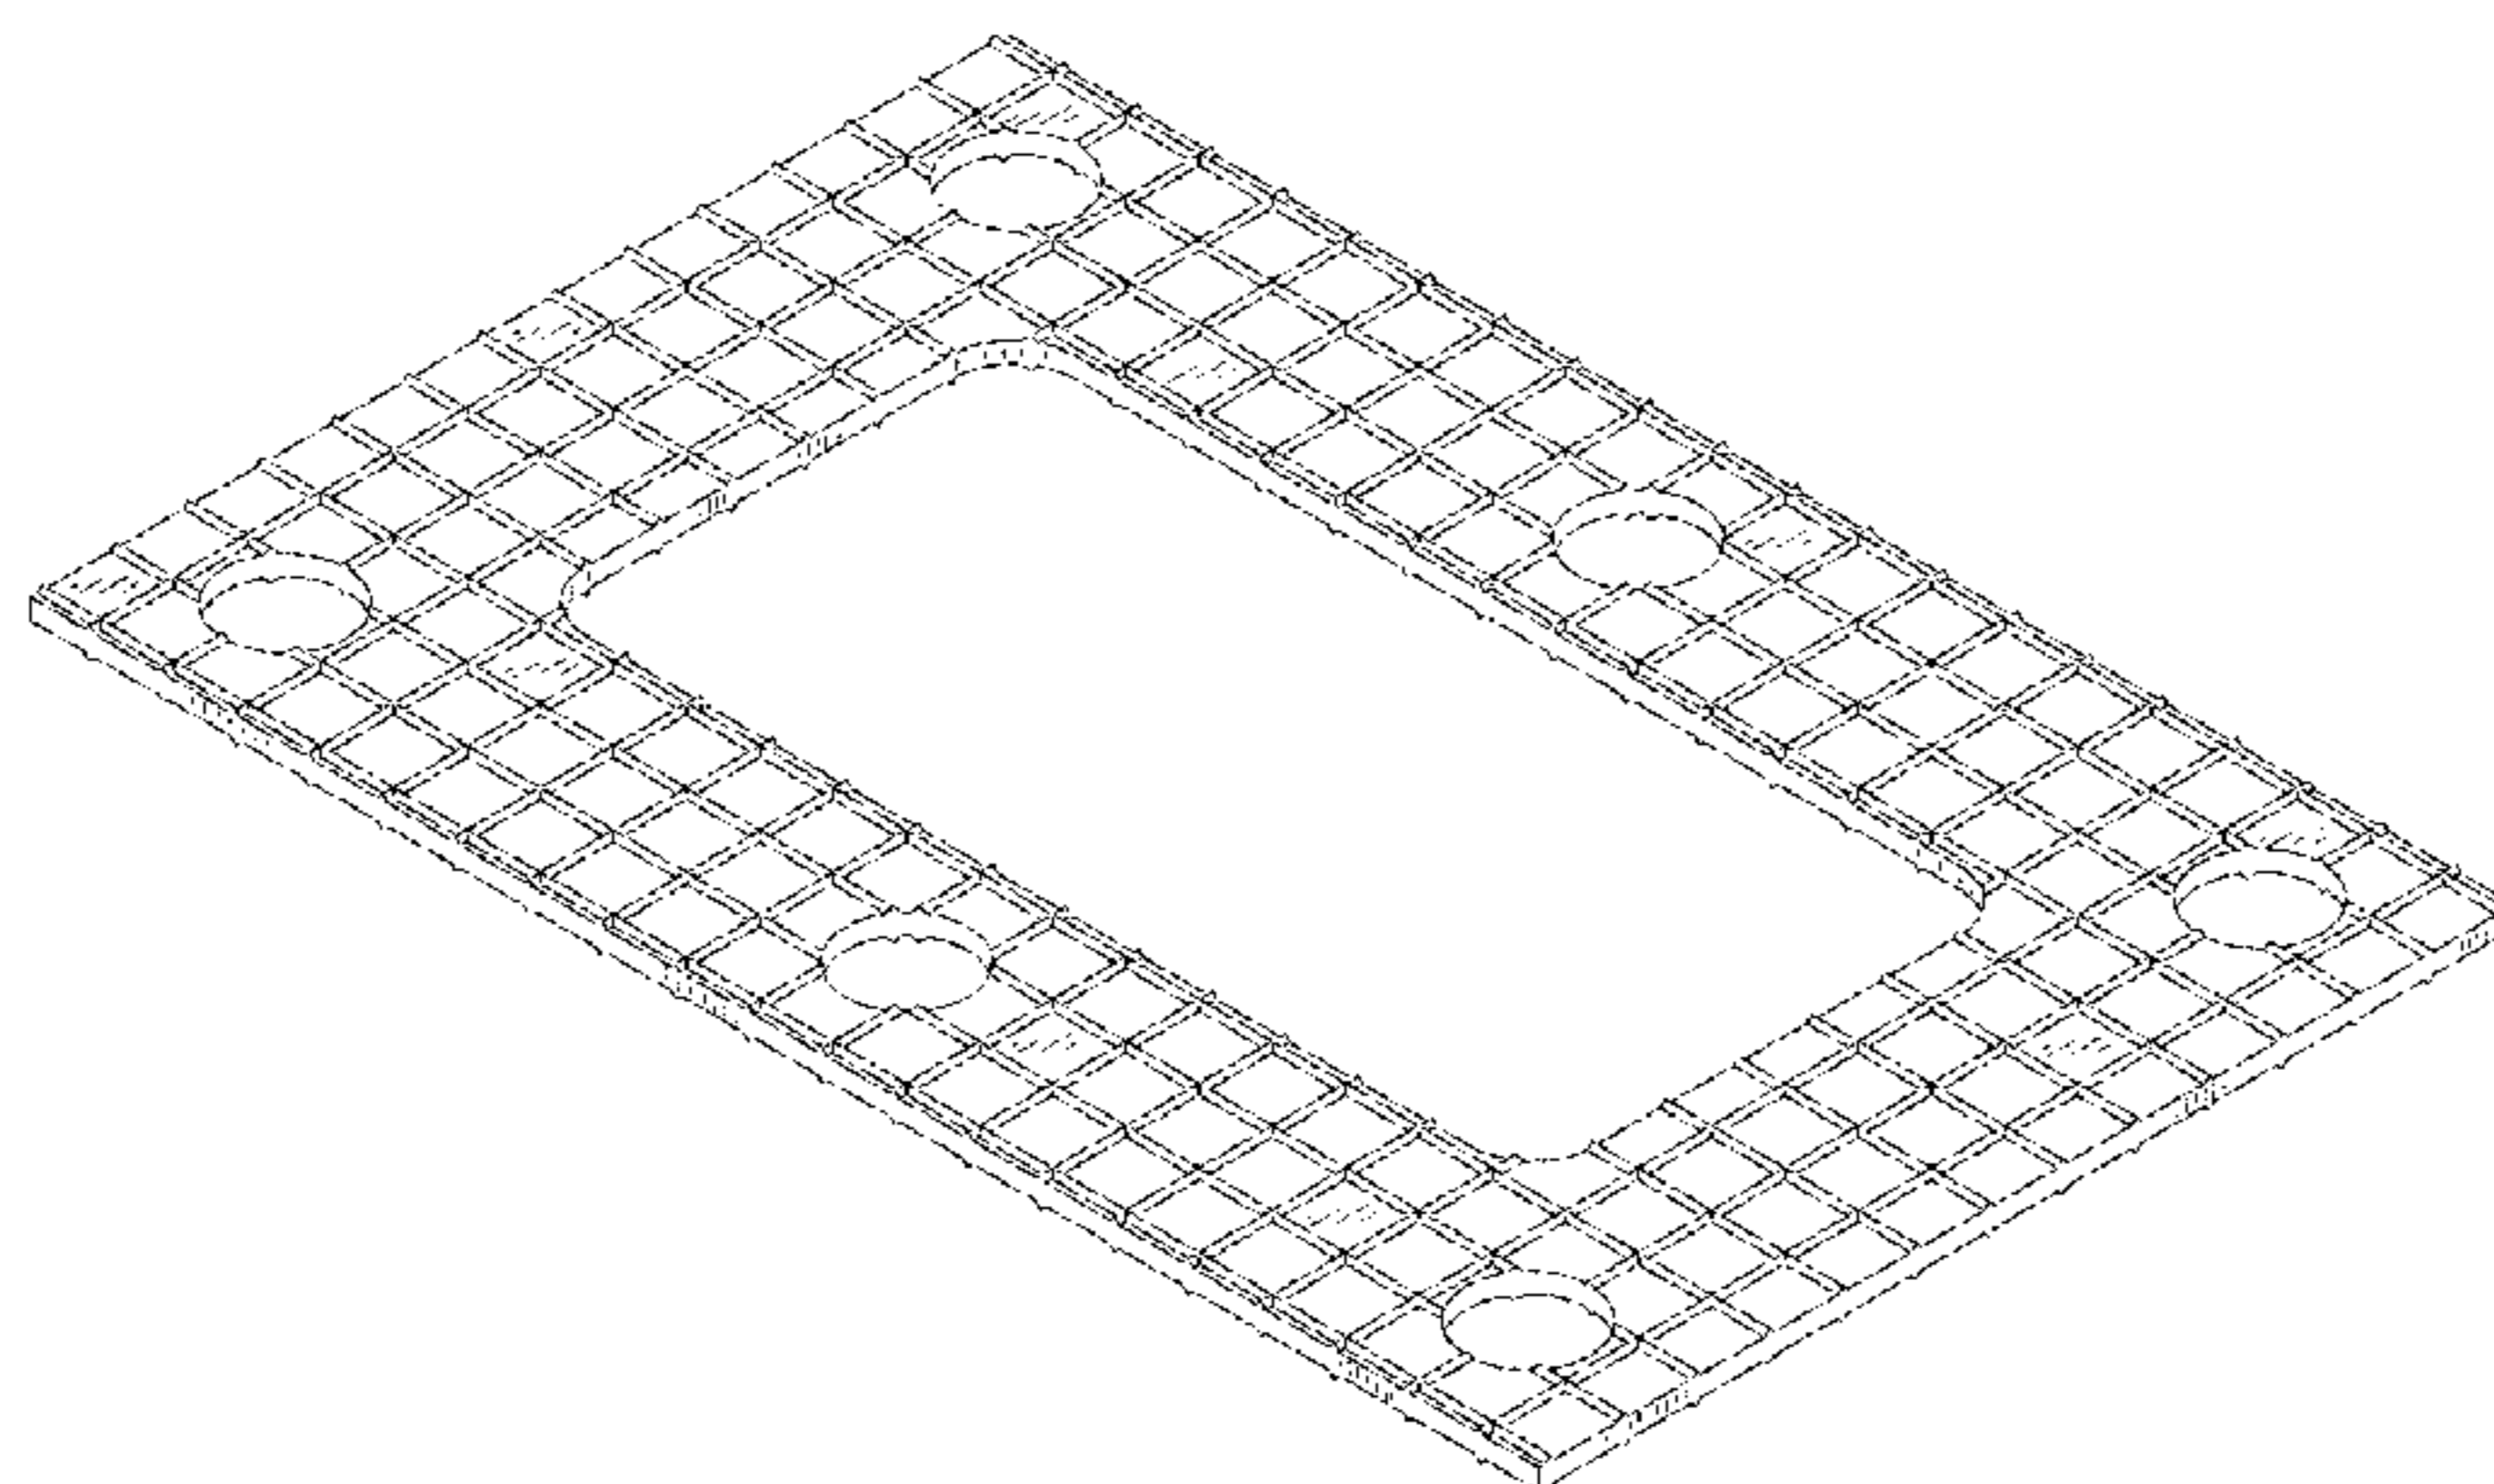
is a front perspective view of a gasket having raised sealing surface pattern;
